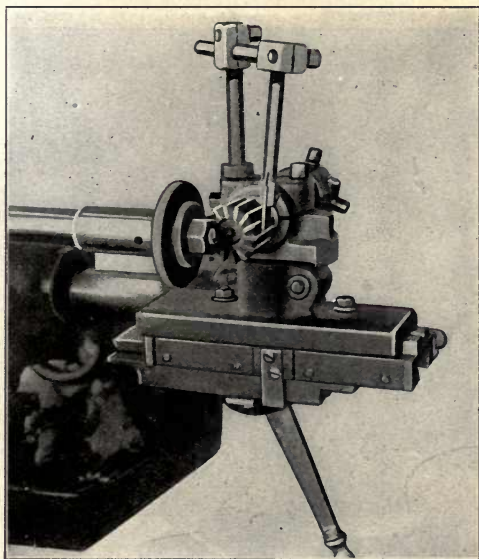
Grinding the side teeth of a milling cutter on the periphery of the wheel on a Brown & Sharpe cutter grinding attachment.
